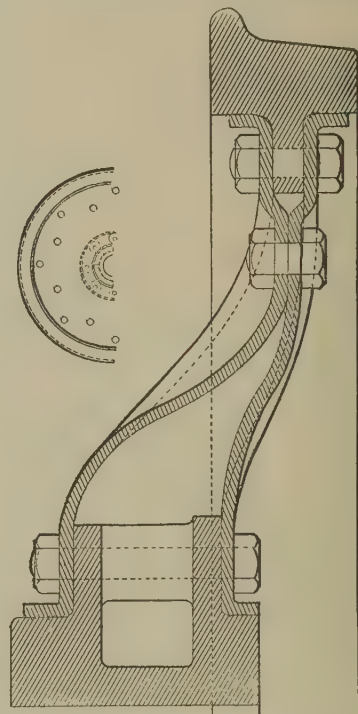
STEEL TIERED WHEEL WITH CORRUGATED PLATES.
